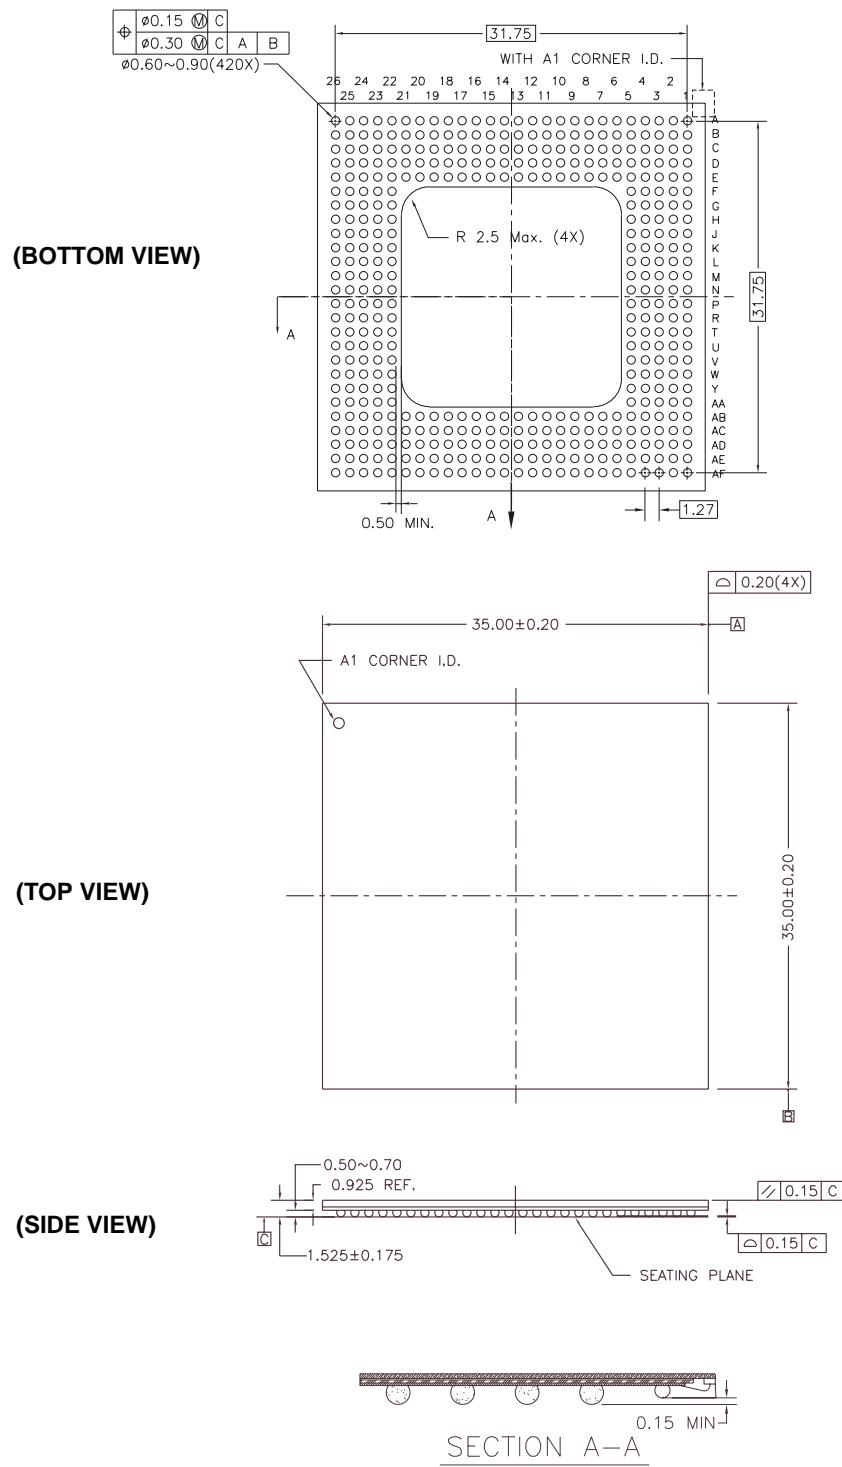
OCX1601 Package—Bottom, Top and Side Views
